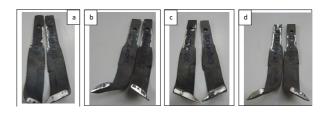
Fabricated blades: a) Blade-I, b) Blade-II, c) Blade-III & d) Blade-IV
